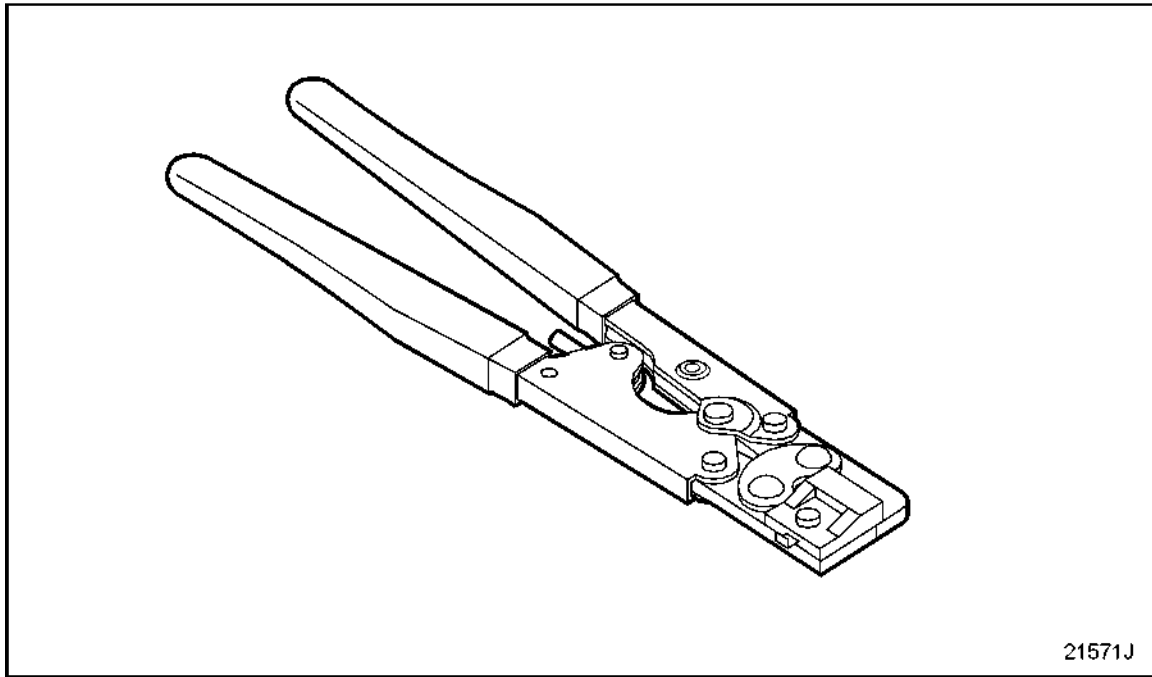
Terminal Crimper (Group 1-Metri-PK),J 35123
